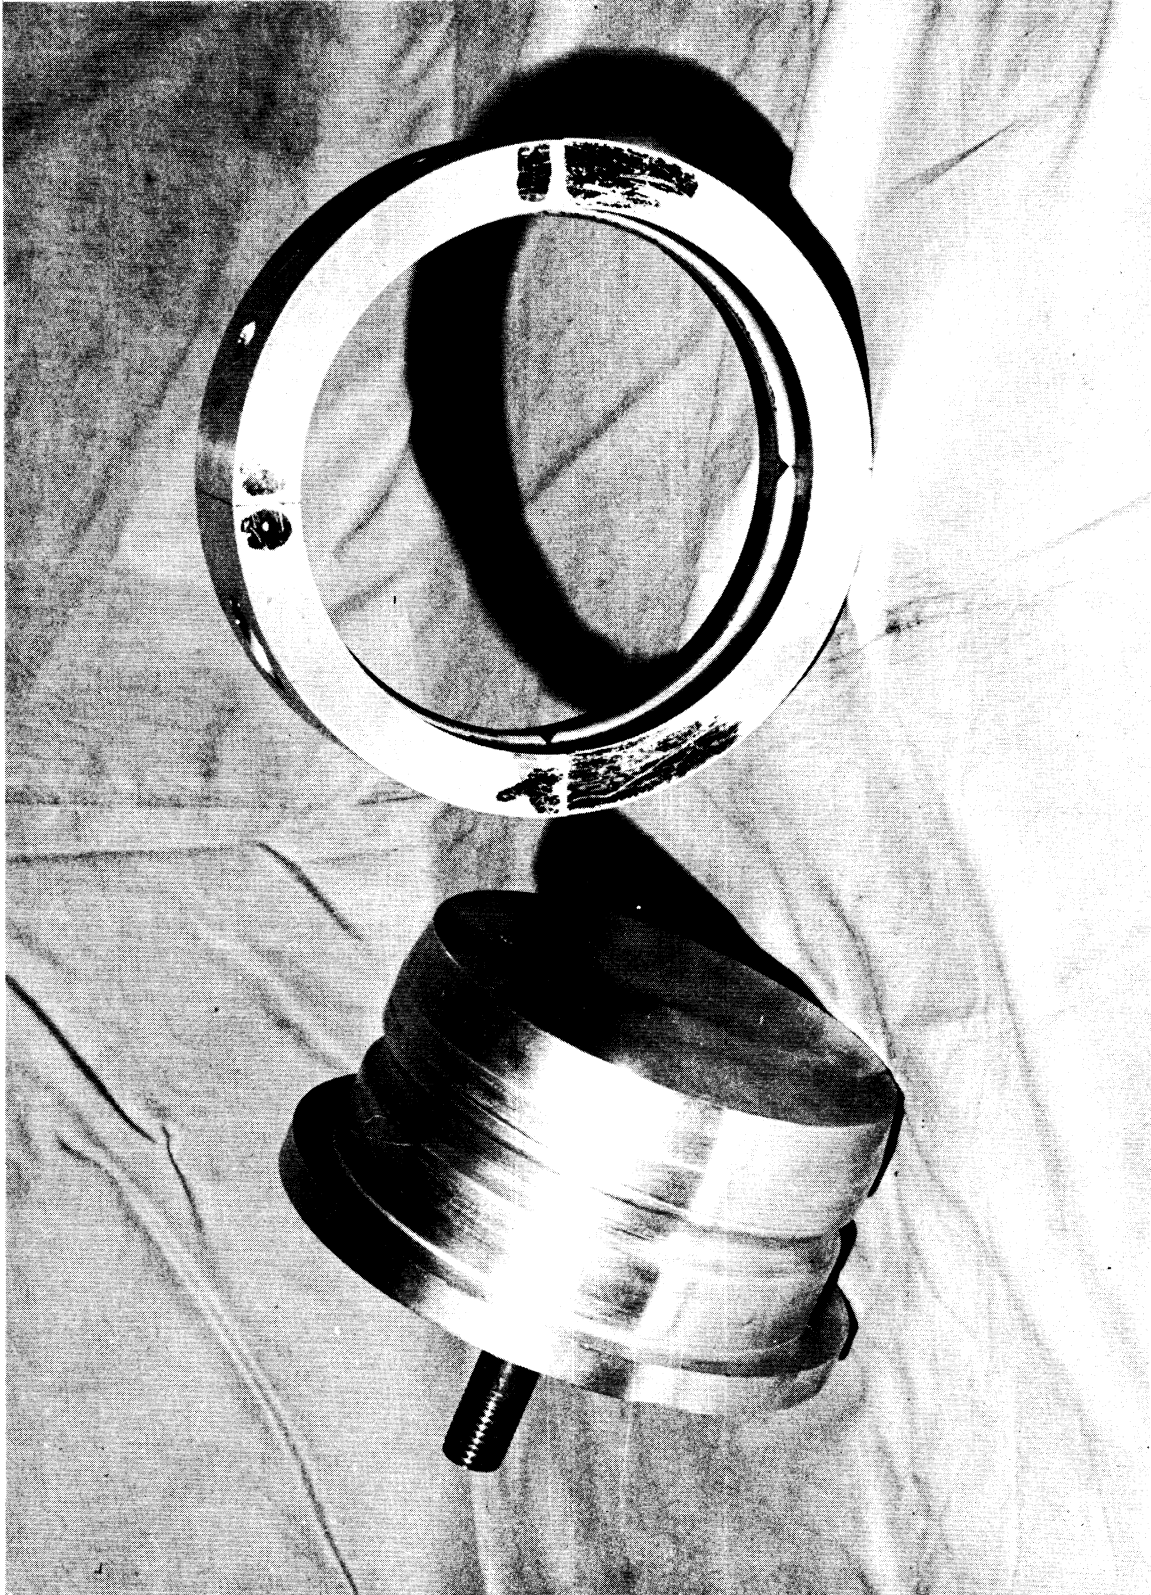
End fittings used to attach tubular test specimens to testing machine.
